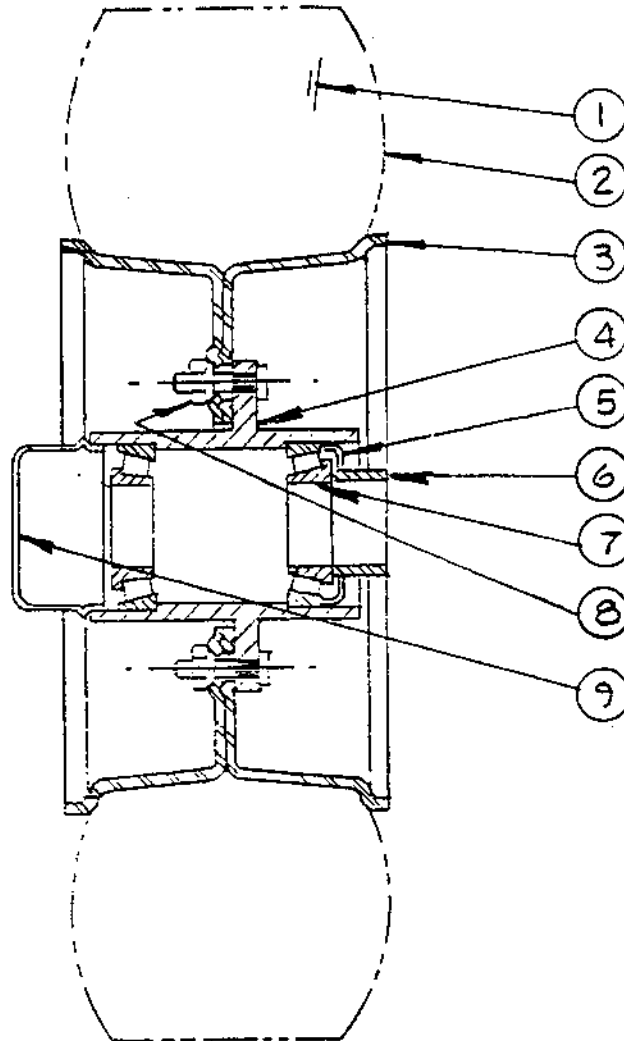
AND PARTS LIST, P/N 102410-1 WHEEL ASSEMBLY
